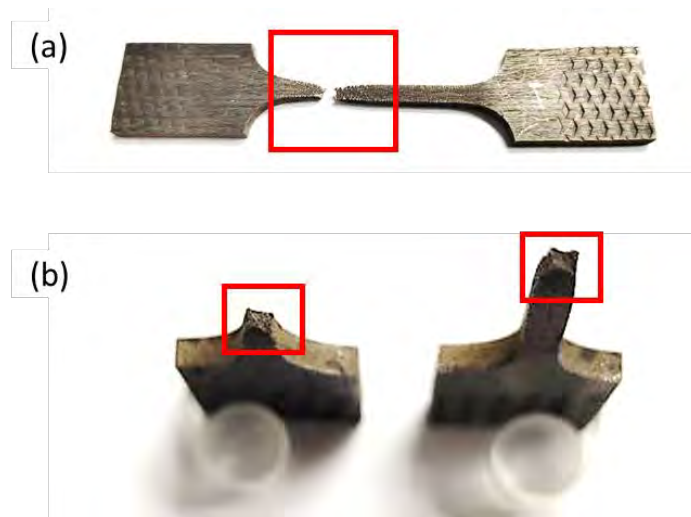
(a) Side view and (b) cross-section view of fractured surface observations position
